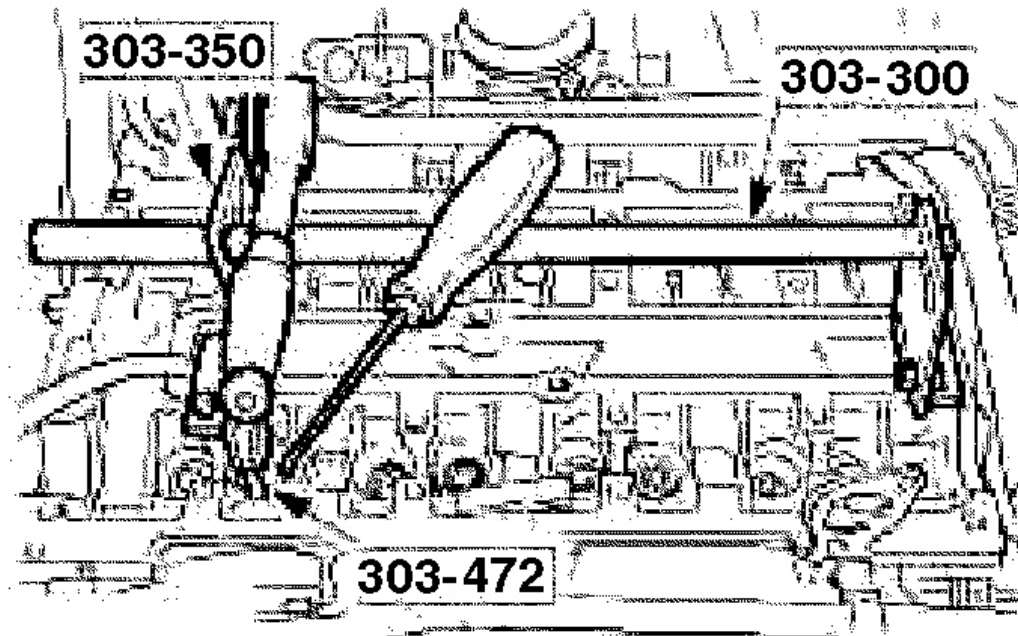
Installing New Valve Stem Oil Seals Using Special Tools
